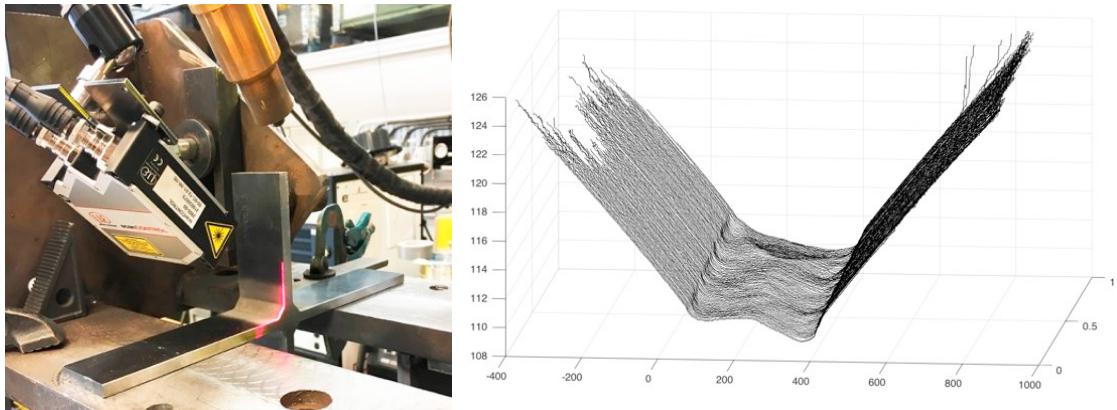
Wintaria® robot weld scanner and result of weld profile;
